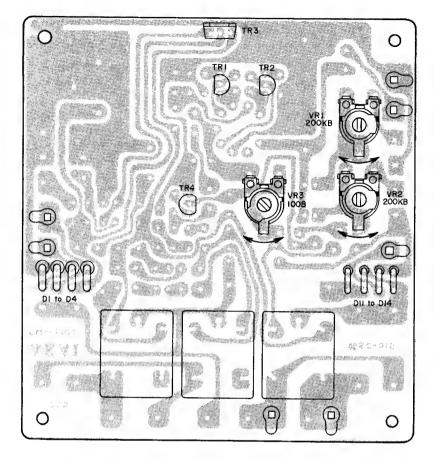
OSC & Power Supply P.C Board CQ-5011
